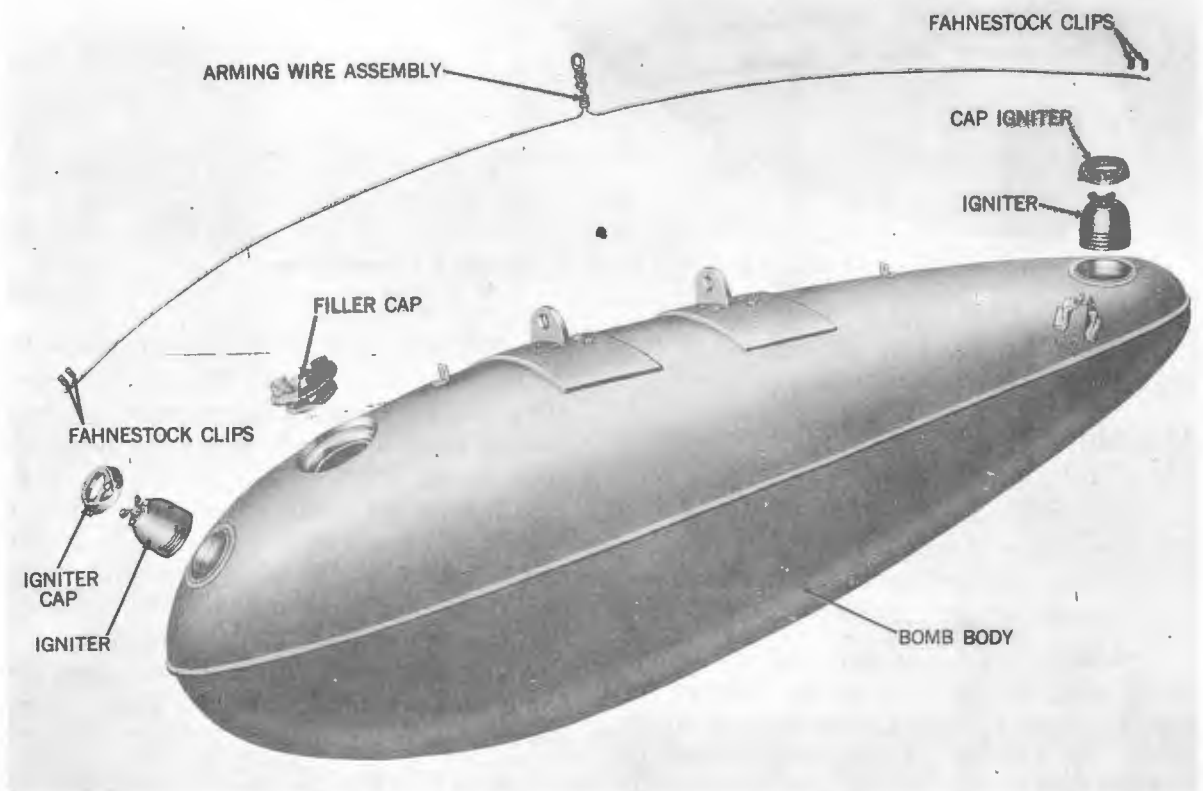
750-lb Fire Bomb Mk 78 Mod 2 Exploded View.
